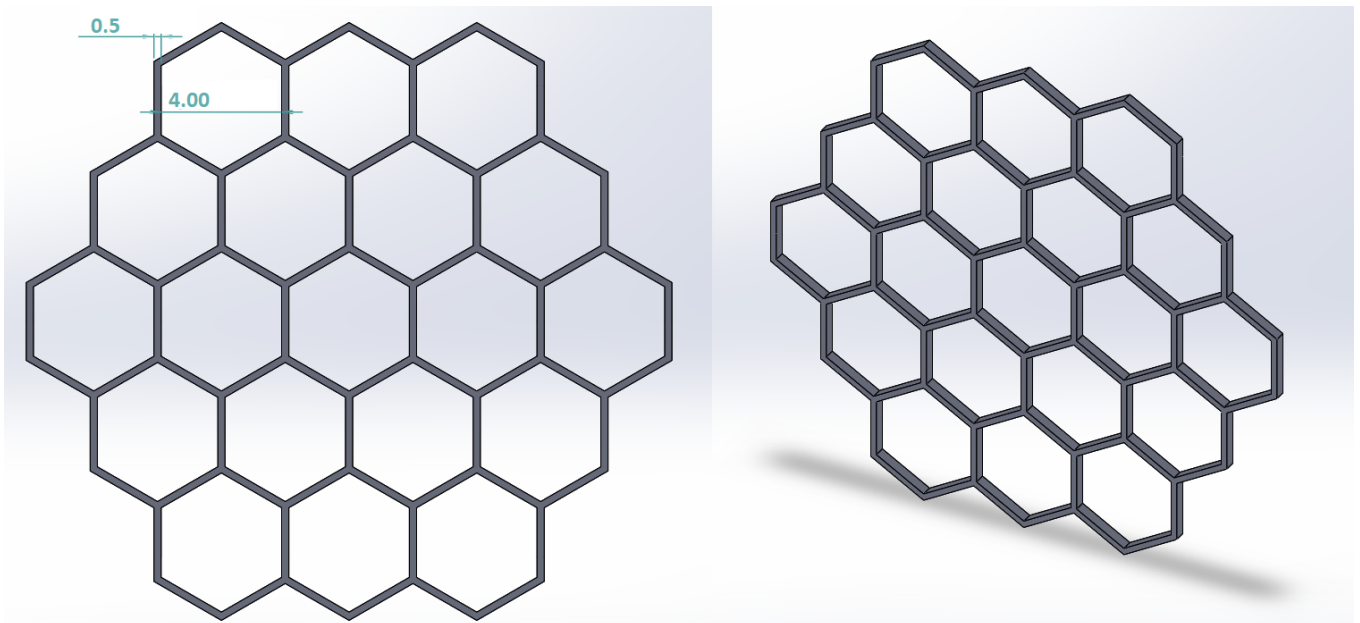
CAD model: 2D- view (left) and 3D-view (right)
